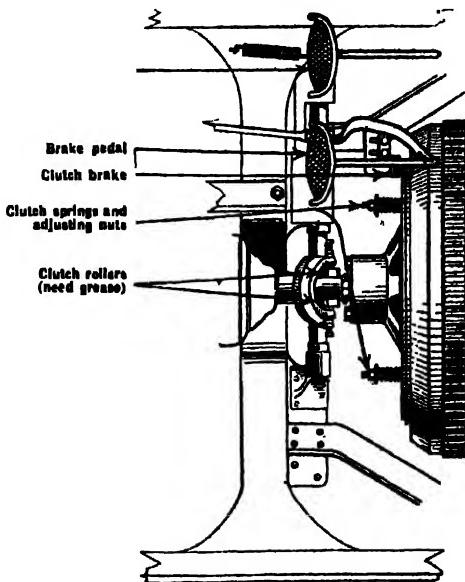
Clutch Control Assembly of Overland Automobiles.
